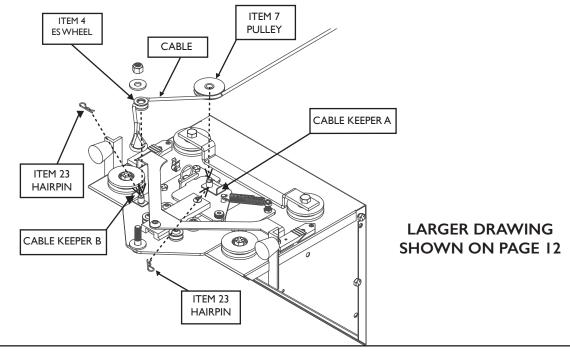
FIGURE I: PLEASE REFER TO PARTS LIST ON PAGE II
